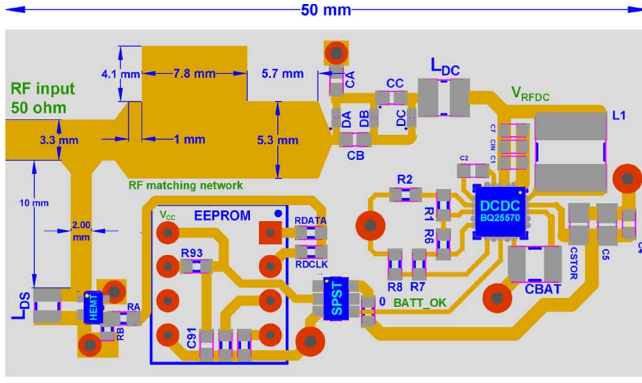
Top layer of implemented PCB on ISOLA FR408 1.52 mm.
